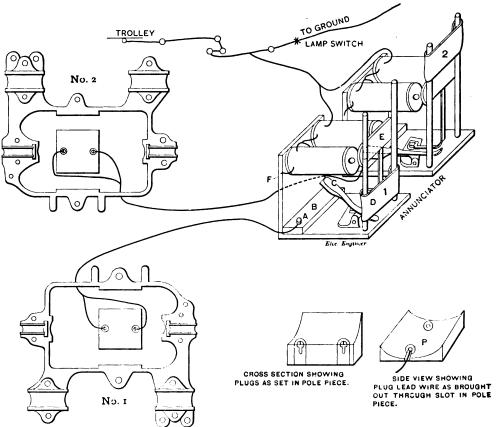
THE GIBBS MOTOR ALARM FOR TROLLEY CAR ARMATURE BEARINGS.
